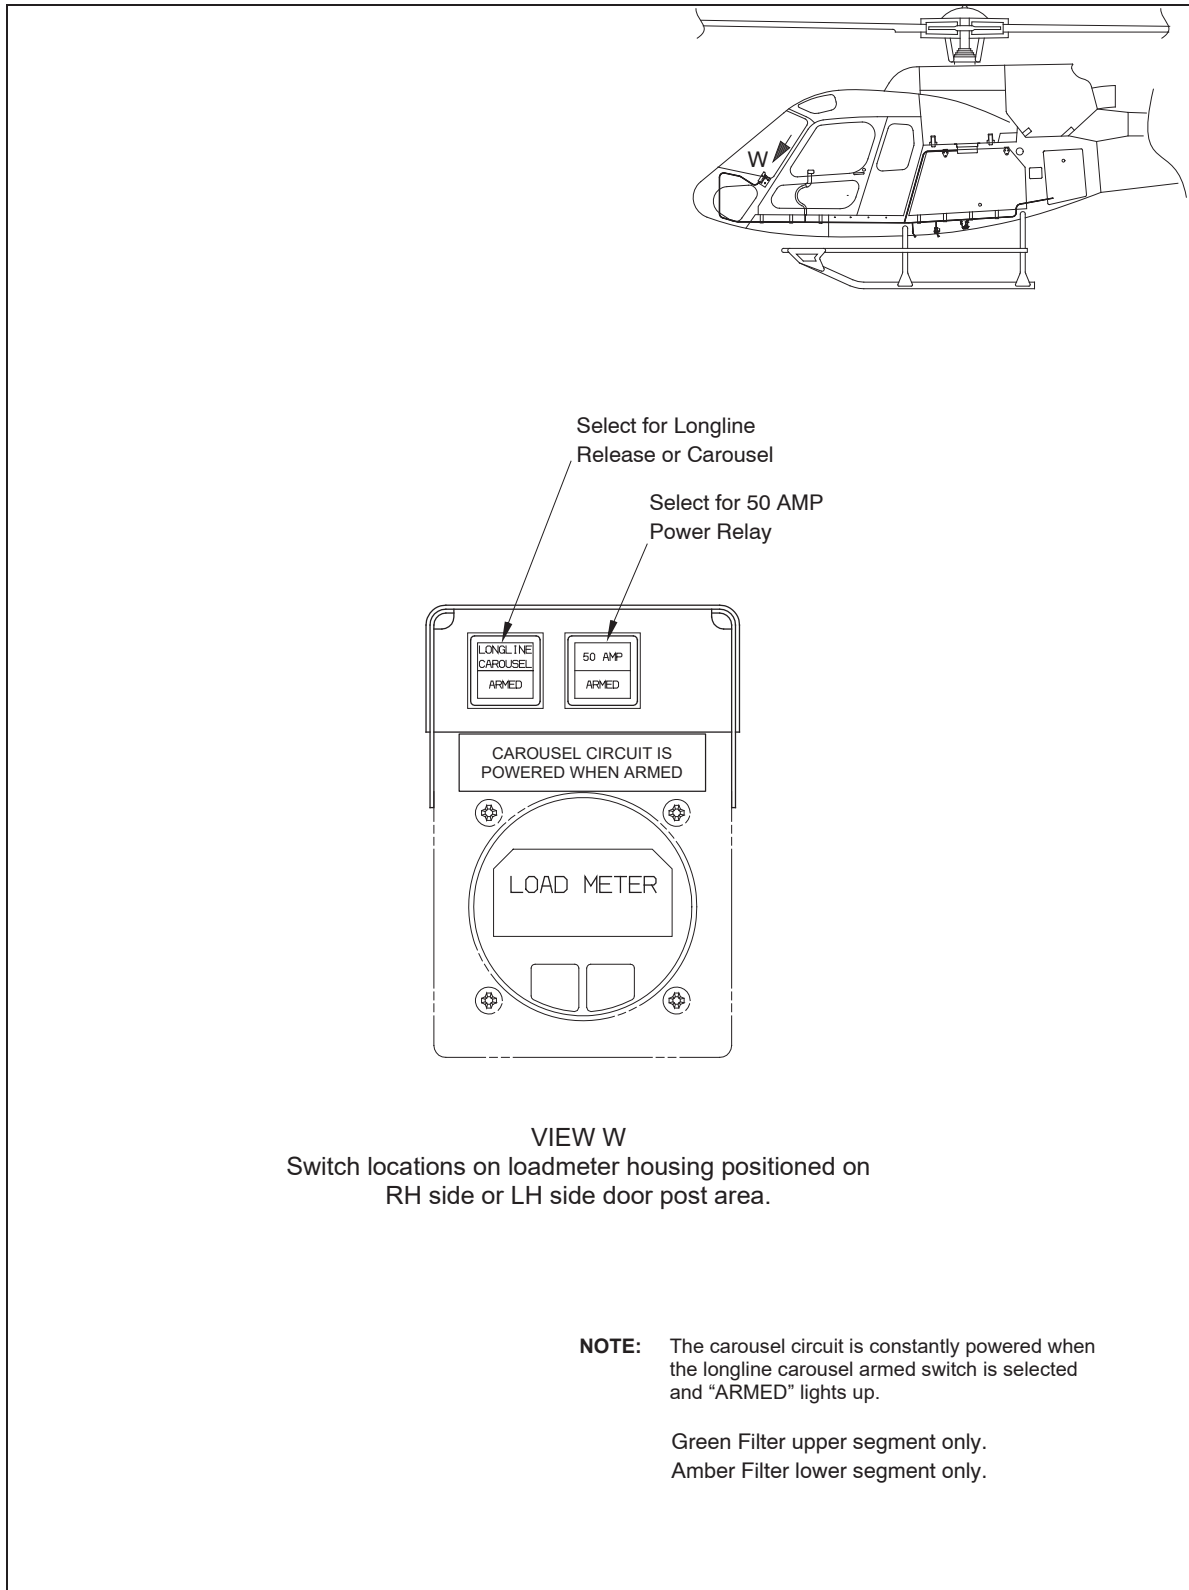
Switch Housing Assembly Installation with Carousel System Modification
